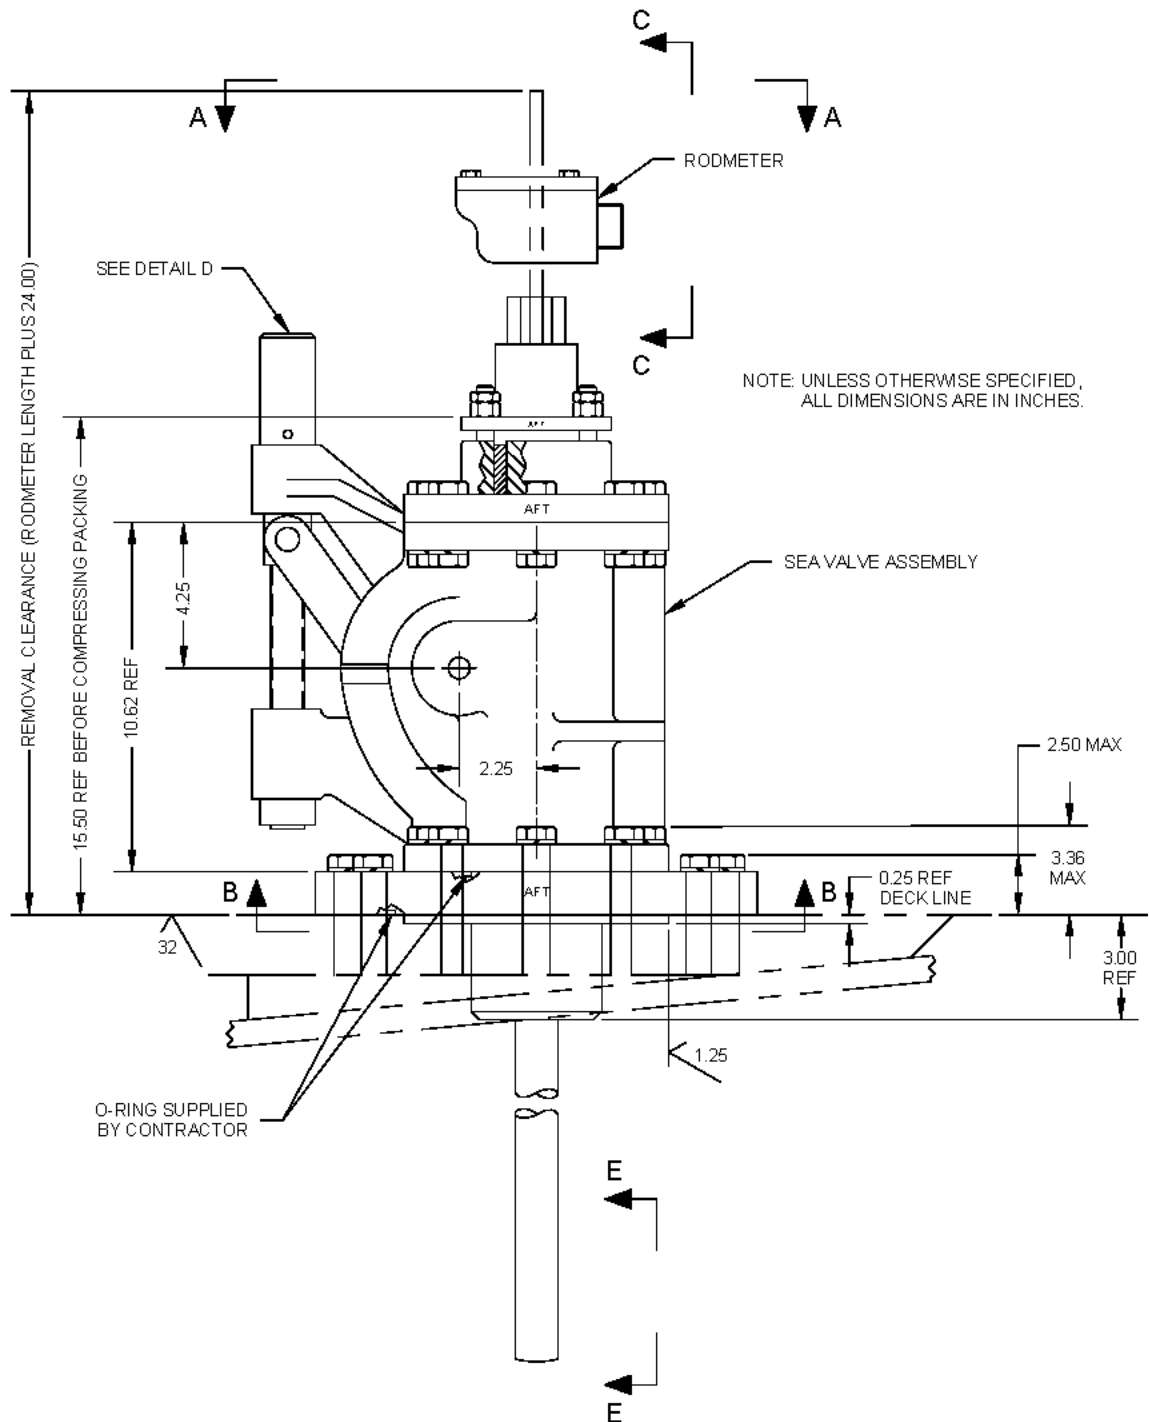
Unit 1 or 6 Rodmeter and Unit 2 or 7 Sea Valve Installation (Sheet 1 of 3)
